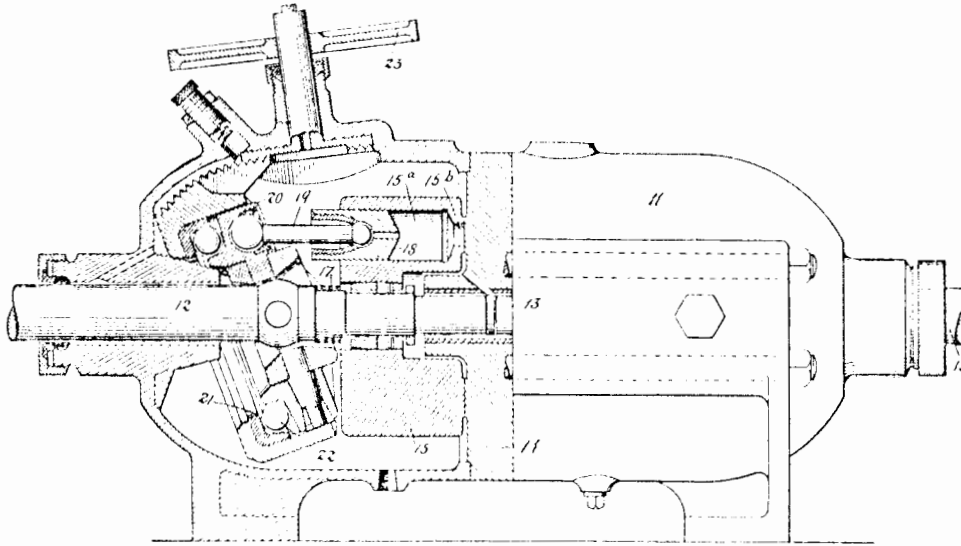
BALL-RACE TYPE OF CRANKLESS MECHANISM
